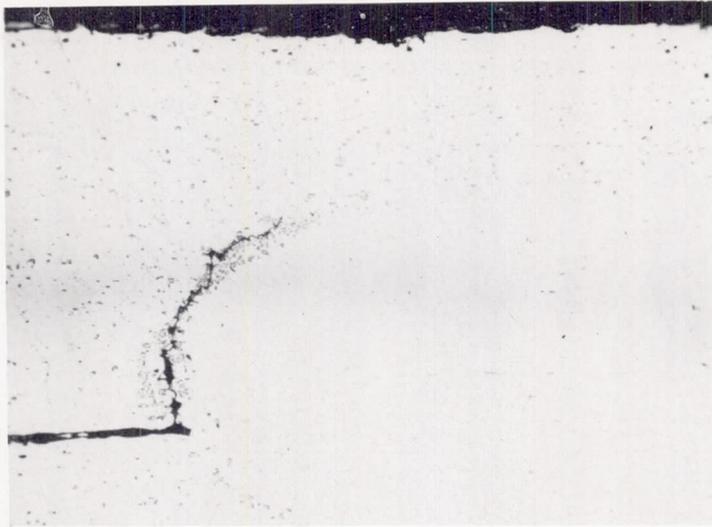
Typical appearance of envelope of constituent particles segregated along periphery of weld nugget, X100. Unetched. This condition was characteristic of R-301-T6 sheet welds, was observed in XB75S-T6 welds, but not apparent in alclad 24S-T3 welds. Identity of constituents was not established completely but from etching characteristics it was believed that they were of the insoluble aluminum-copper-iron-manganese phase. The crack, possibly formed during specimen preparation, illustrated susceptibility of the condition to propagation of fracture.
